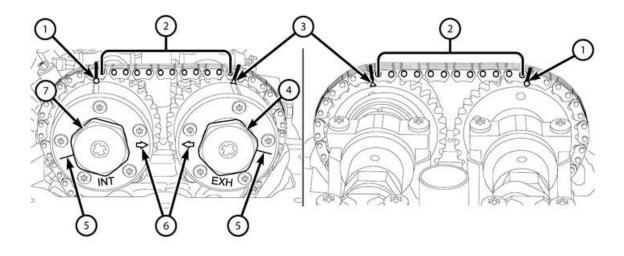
Phaser Timing Mark, Chain Pins, Exhaust Cam Phaser Triangle Marking, Oil Control Valve, Scribe Lines & Arrows
